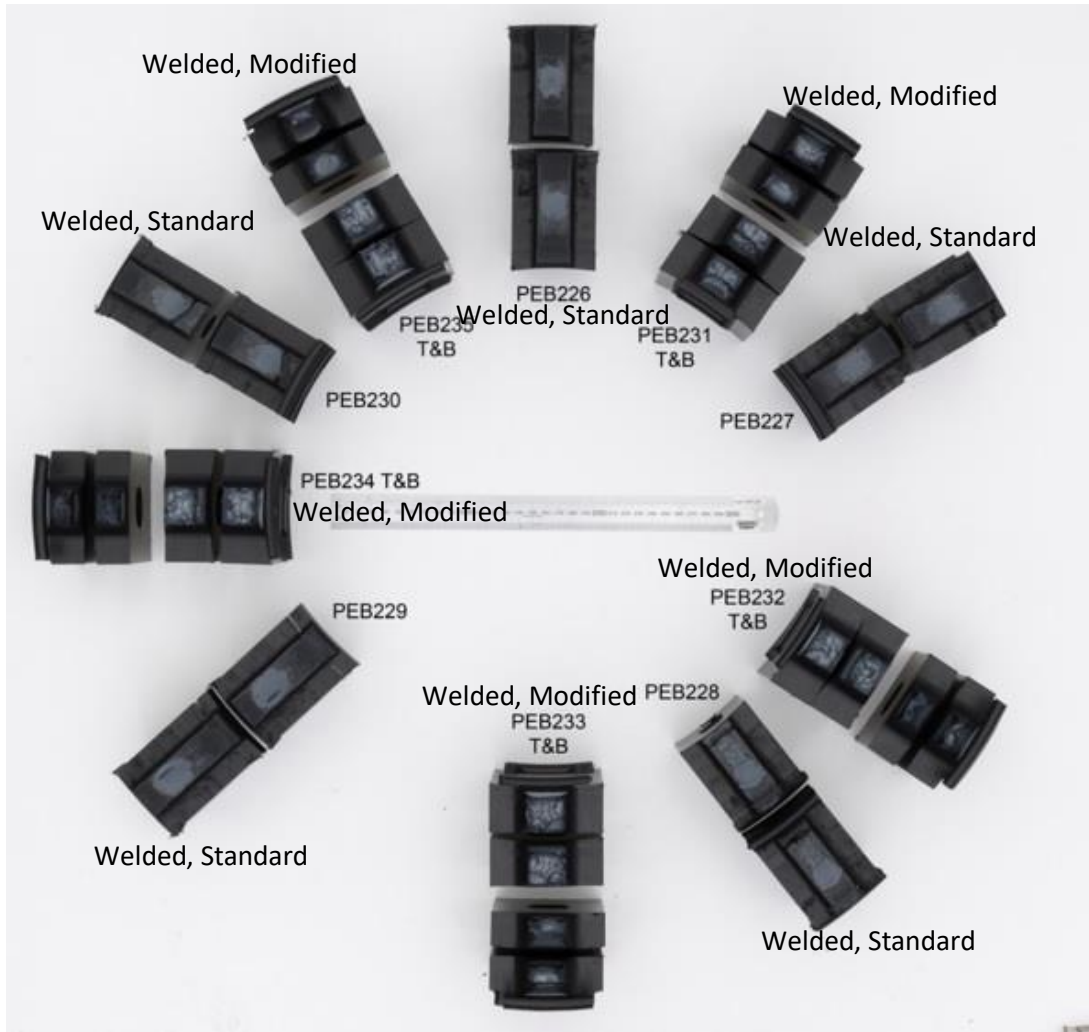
, Fracture surface for welded 630mm OD pipe SDR 11 using standard and modified geometry
